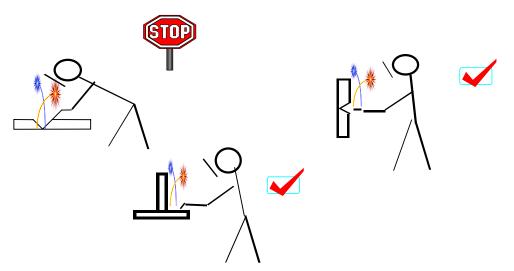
The welder's head should not enter the visible fume plume.
